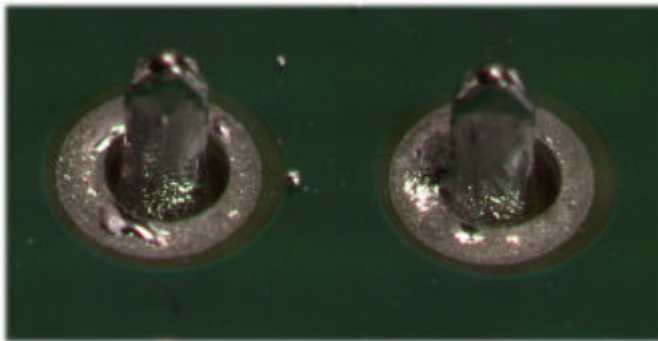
All the copper on the pad of this assembly has become dissolved into the solder during drag soldering at a temperature of 320 °C.
